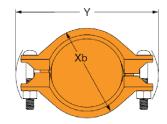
SLT SlideLOK® Pre-Installed Cap & Coupling
